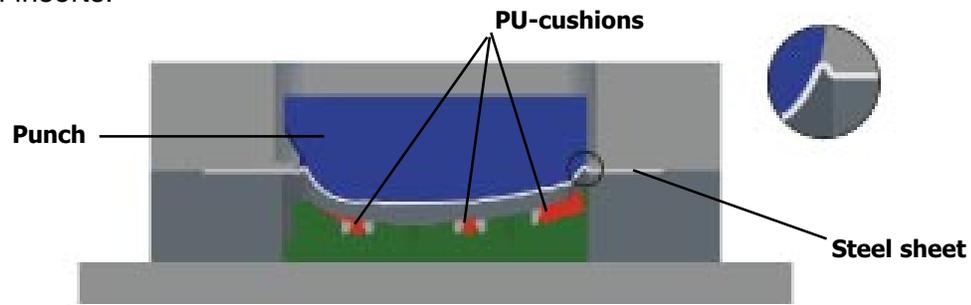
Cross section of PU calibration tool - Deep drawing step
